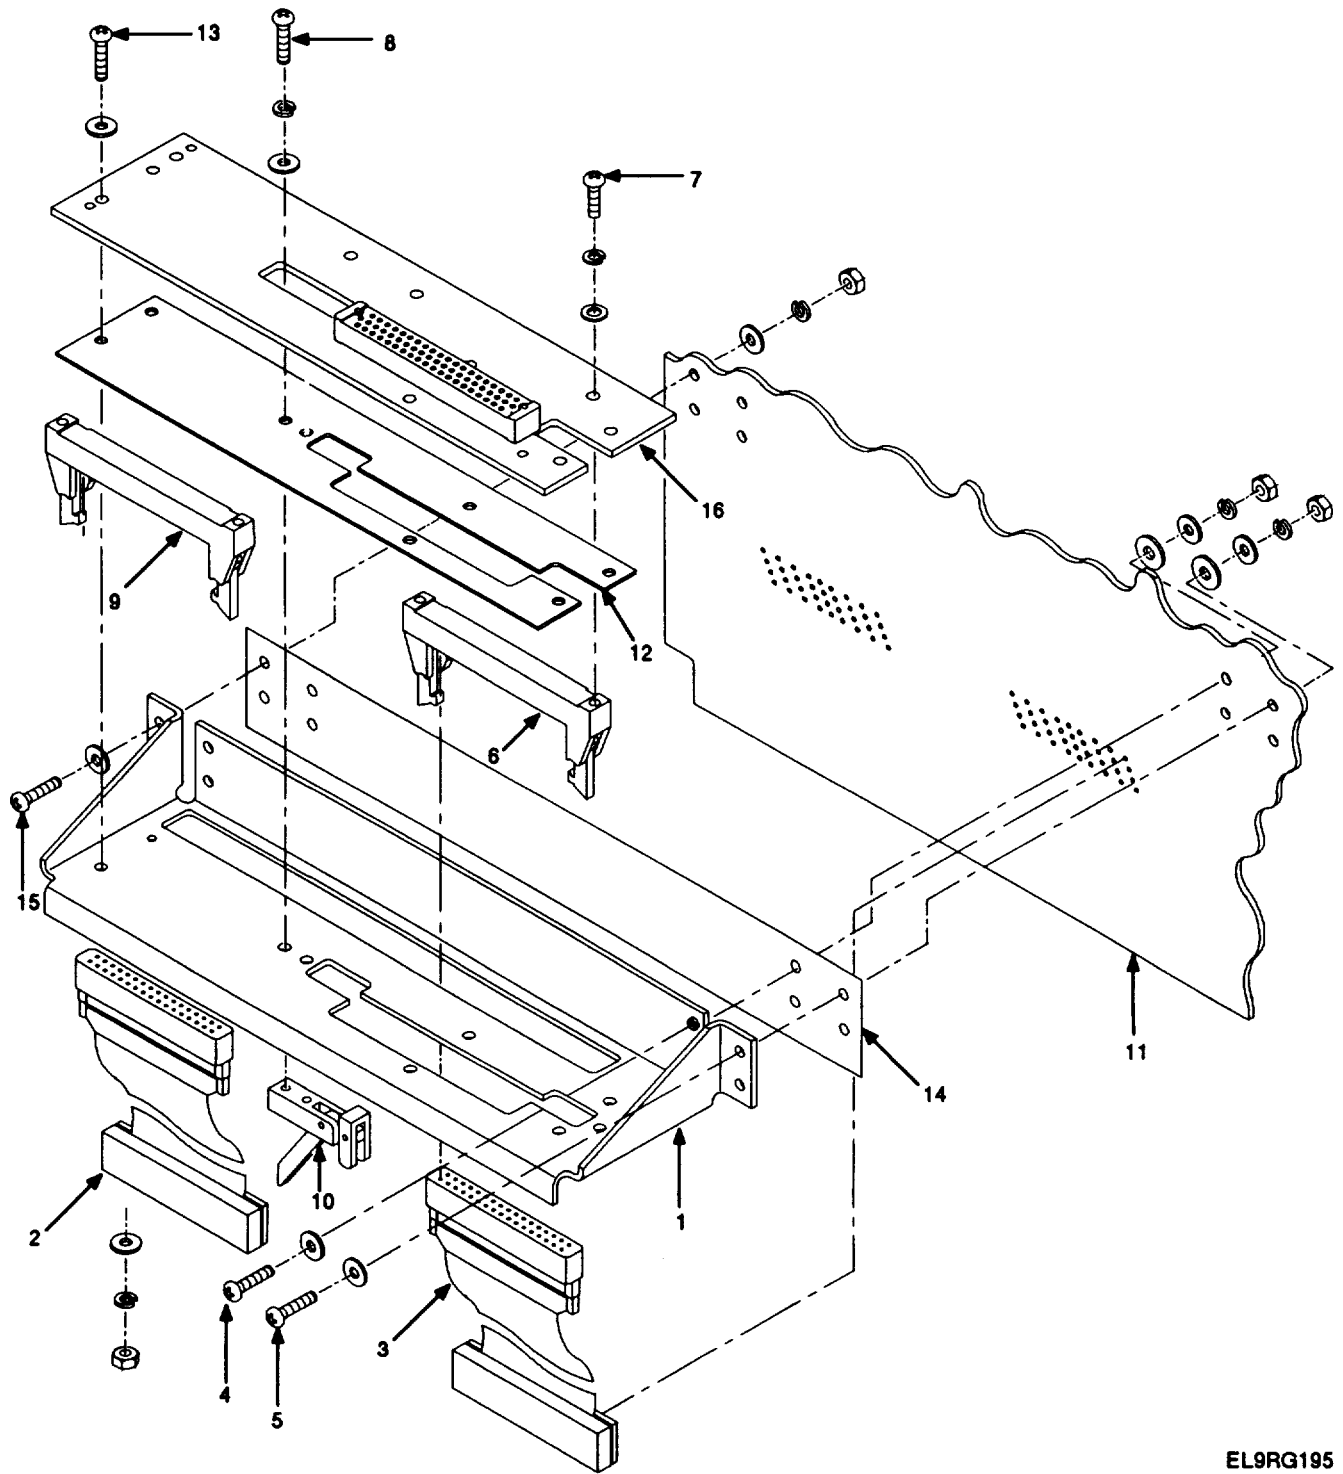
41 Pin Connector Bracket Board Disassembly
